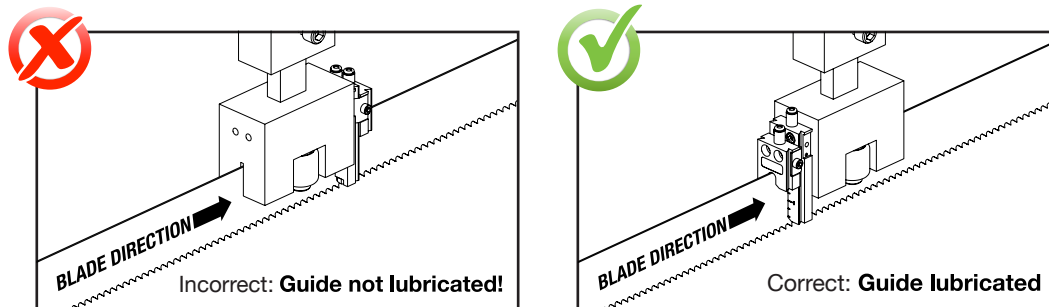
Mount the Band Saw Guide Nozzle on the entry side of the blade guide for proper lubrication
